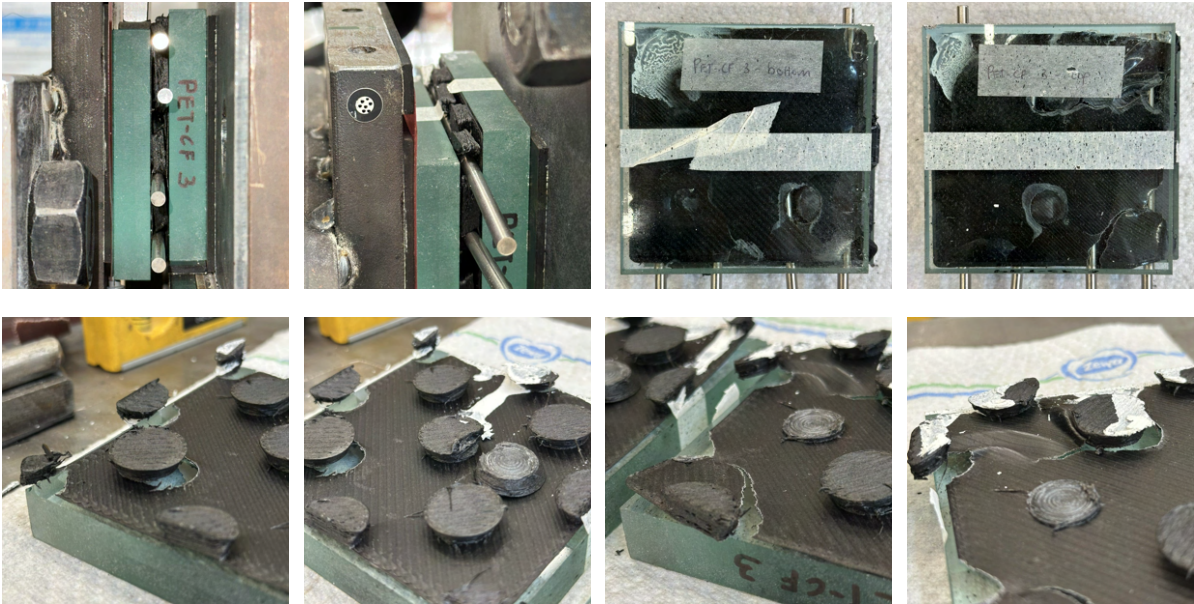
Specimen S7 — PET-CF, Geometry 3 after testing
